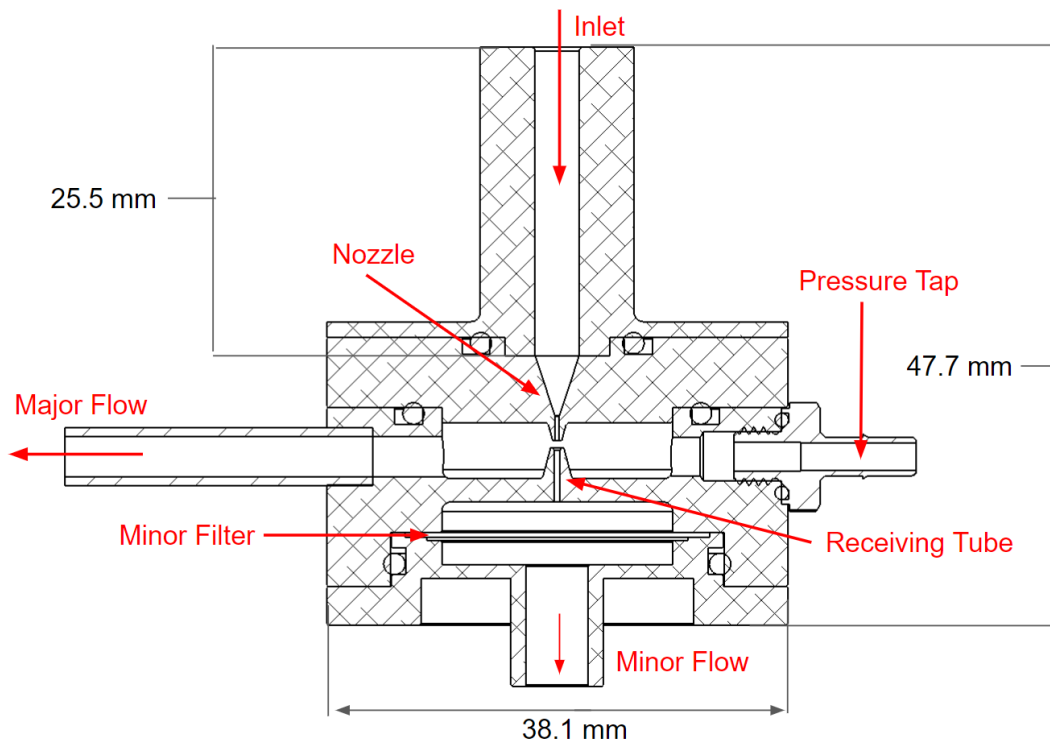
Cross-section of impactor from CAD model with key features of the impactor labeled. The geometry shown is optimized for focusing and referred to as the “Long Inlet” geometry due to the long nozzle inlet.
